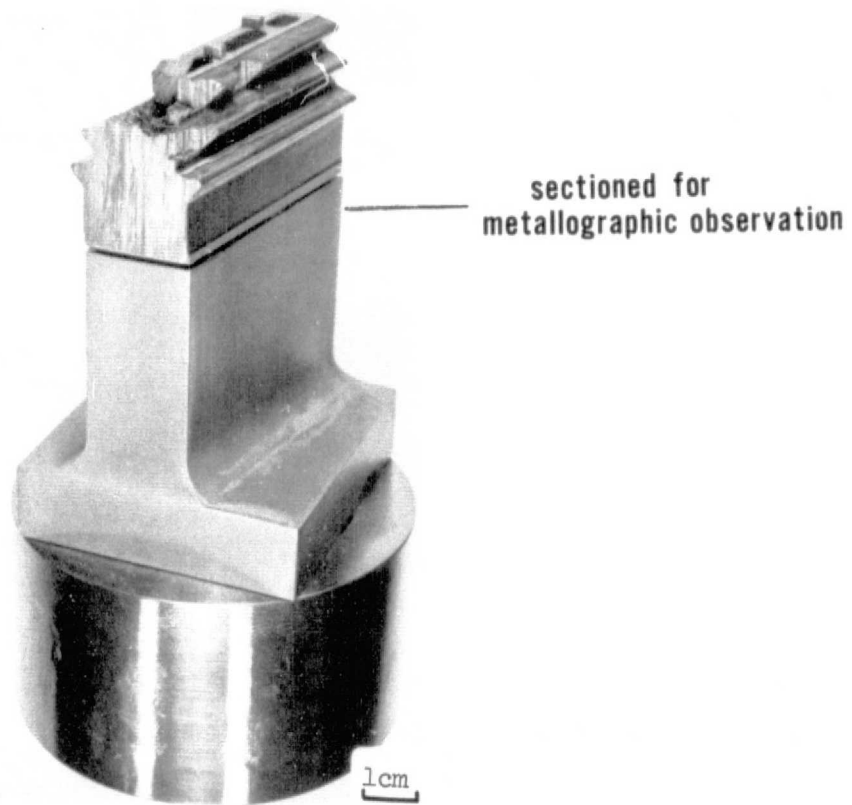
Shrink fit B1900 + Hf collar used to prevent splitting grip on eutectic root subcomponent LCF specimen
